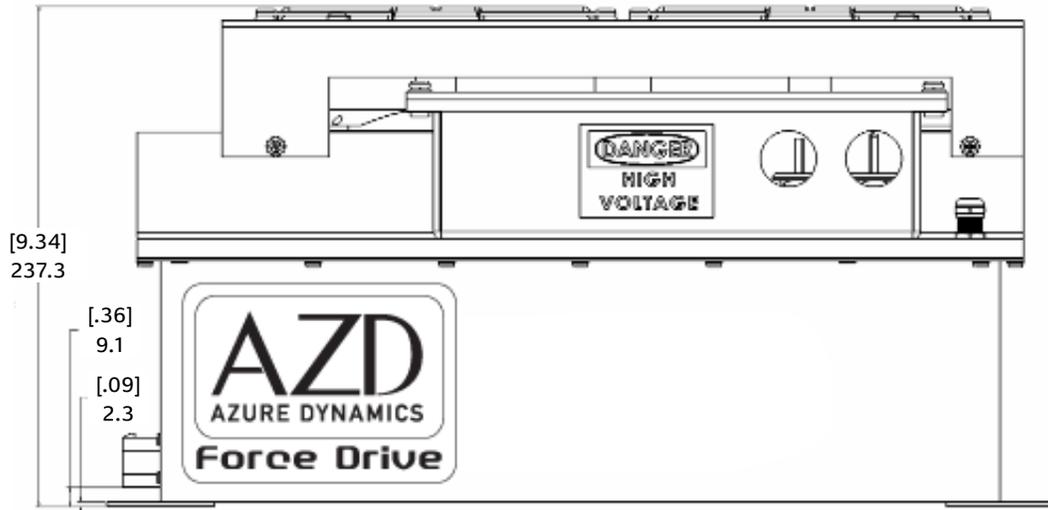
DMOc445 Air-Cooled Dimensions, Side View
